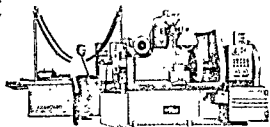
Automatic gear-grinding machine. (Gear Grinding Machine Co.)
